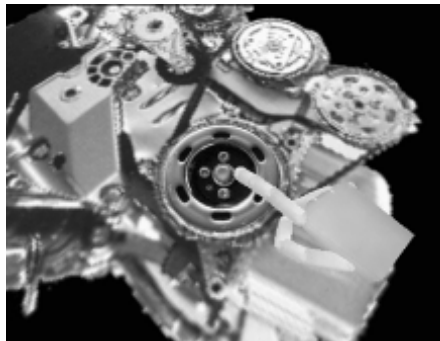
Tactile exploration of parts of a virtual car engine prototype.
